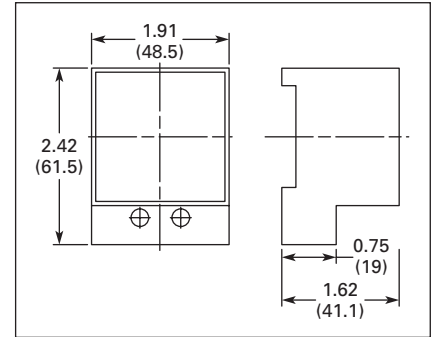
DIN Rail Adapter — Approximate Dimensions in Inches (mm)
